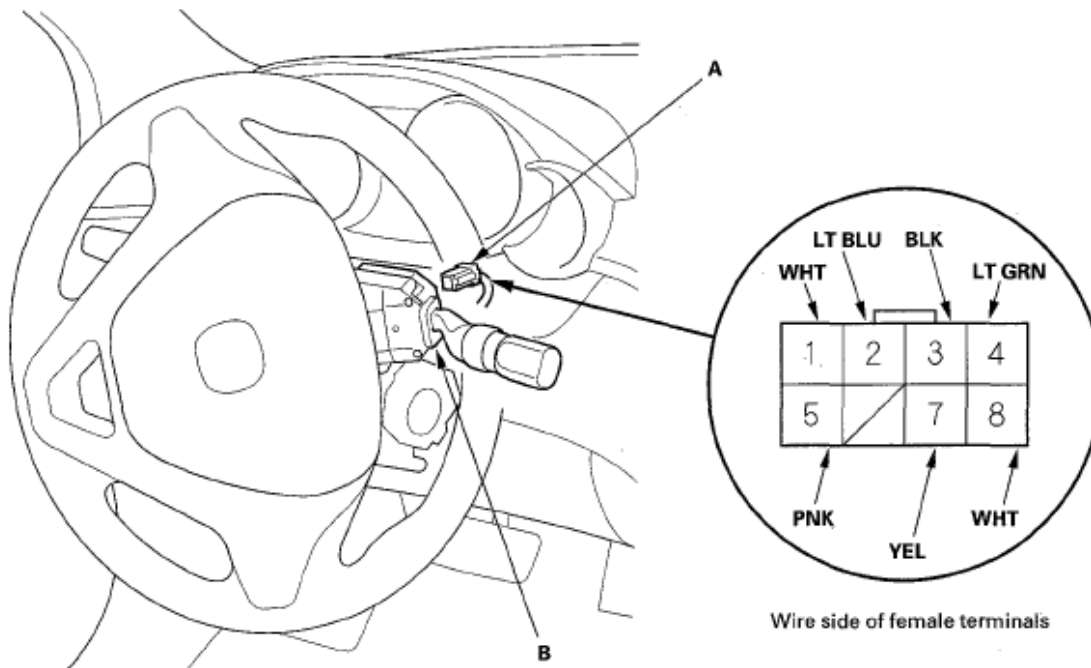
Identifying Wiper/Washer Switch And 8P Connector
